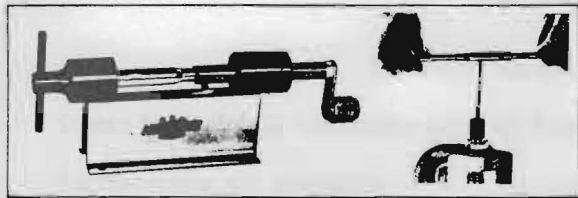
Because of the two-caliber "jump" (from .308 to .257), the necks have thickened and must be reamed, either with a special die (left) or with a lathe-type unit.
